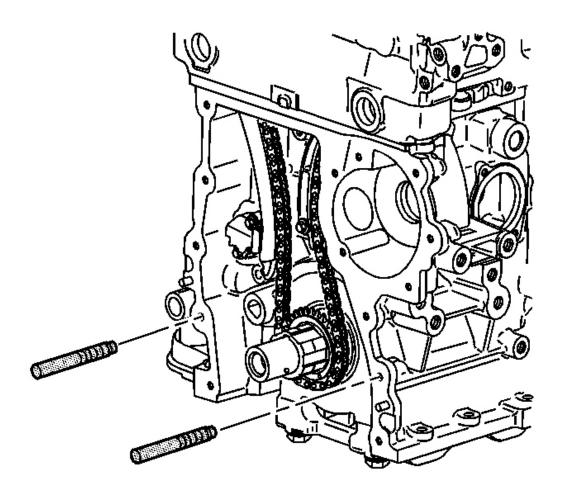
Installing J 44219 Into Engine Block Courtesy of GENERAL MOTORS CORP.
